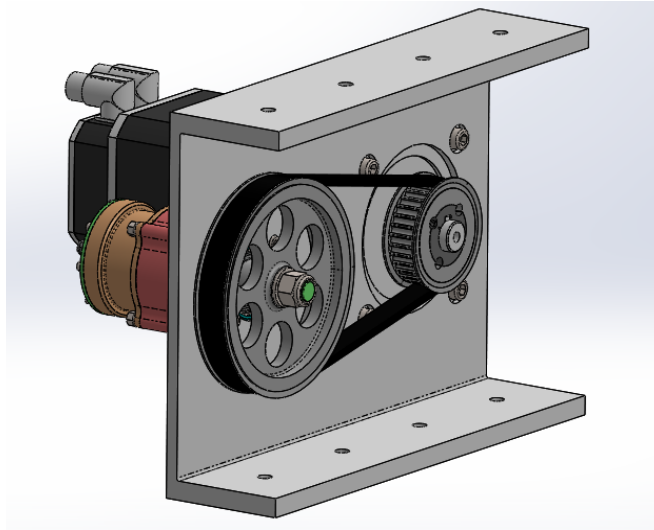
customized test bench assembly: the rotative damper on the left is driven by an electric motor (black element) through a belt pulley
